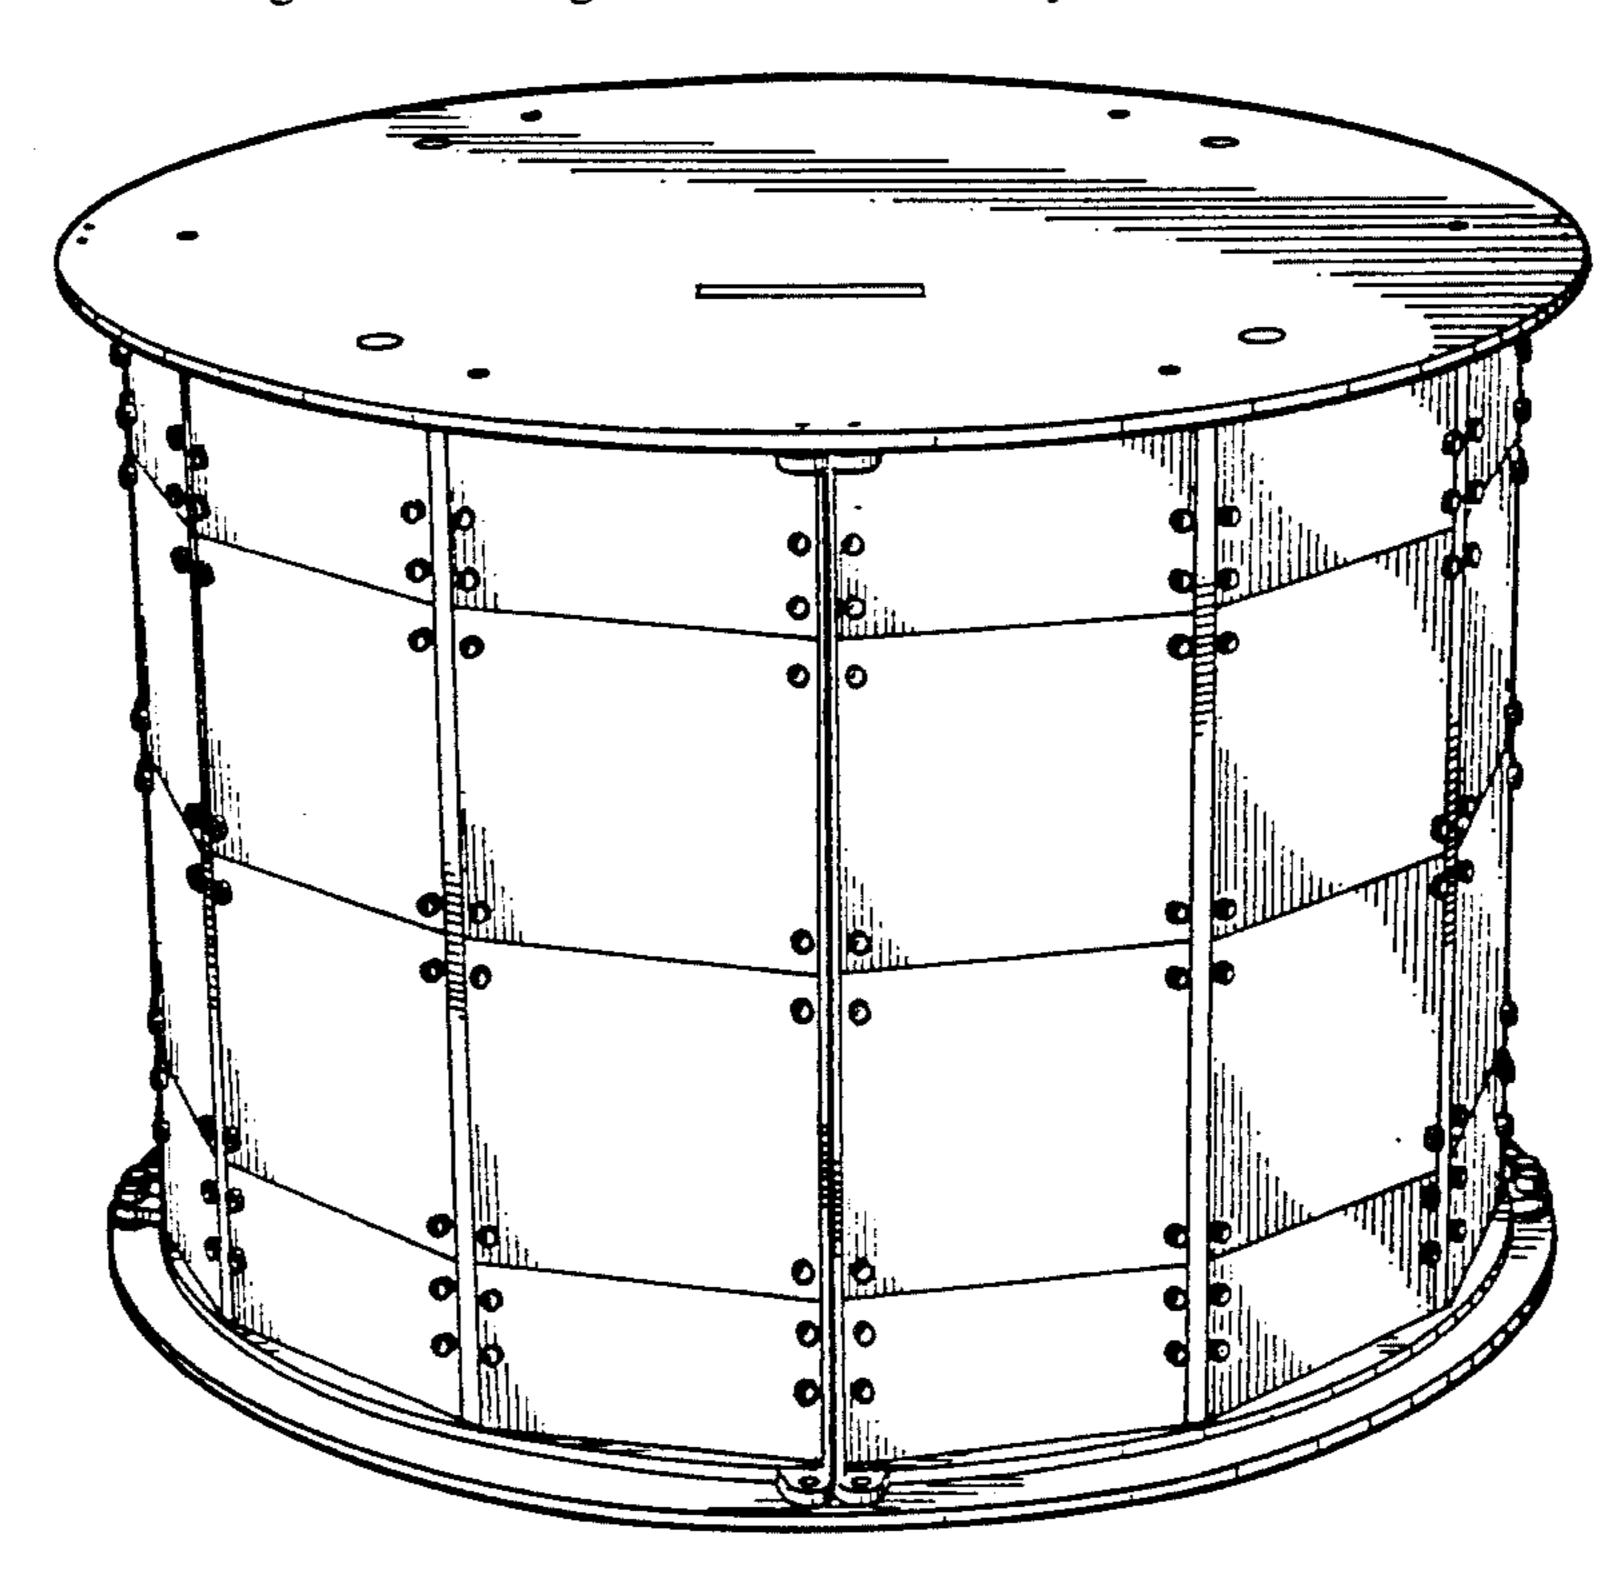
is a top front perspective view of a combined electronic component rack and enclosure showing my new design;
